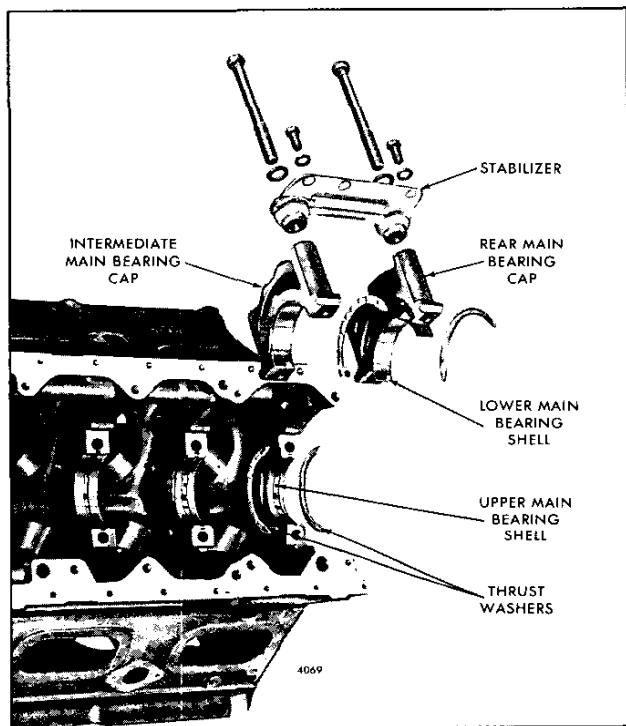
Main Bearing Shells, Bearing Caps and Crankshaft Thrust Washers — V-Type Engines
